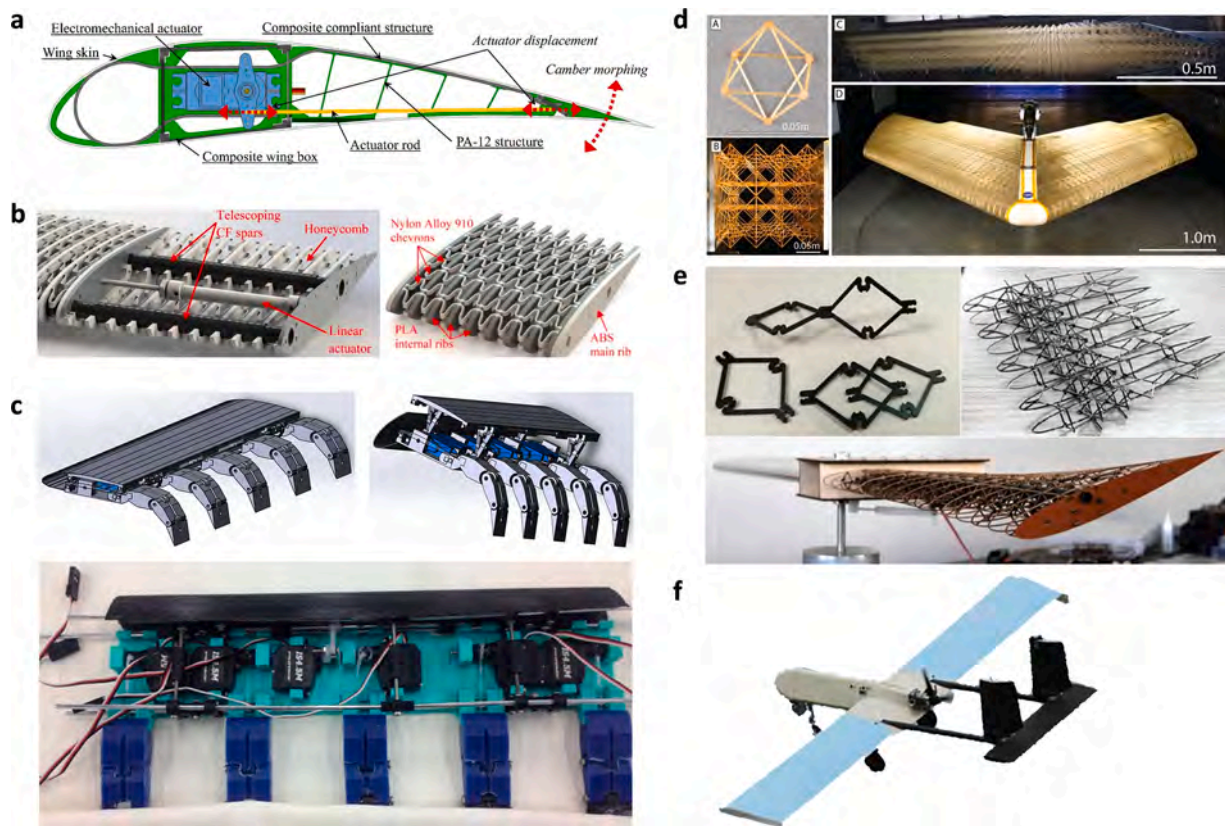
Applications of AM in morphing wings. (a) 3D printed composite compliant structure (in green color)[399], (b) 3D printed honeycomb chevrons and main ribs [394], (c) adaptive wing segment built by 3D printed components [396], (d) and (e) morphing wing lattice structures built by 3D printed components [401,402], and (f) flight tested UAVs with 3D printed morphing wings [404].
